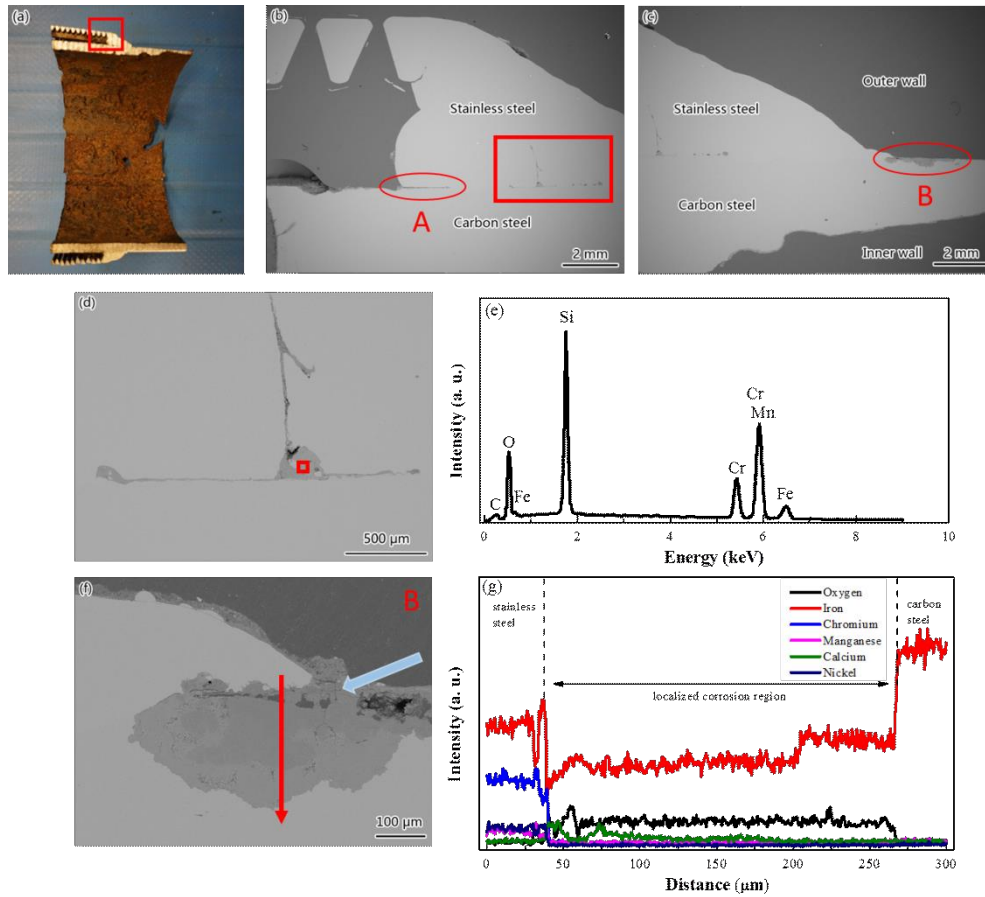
(a) Macroscopic image and (b) (c) SEM images of the weld zone; (d) (f) magnified images of the welding defect [red box in (b)] and localized corrosion region [region B in (c)]; (e) EDS analysis of the welding defect region and (g) elemental distributions denoted by the red arrow line in (f).
